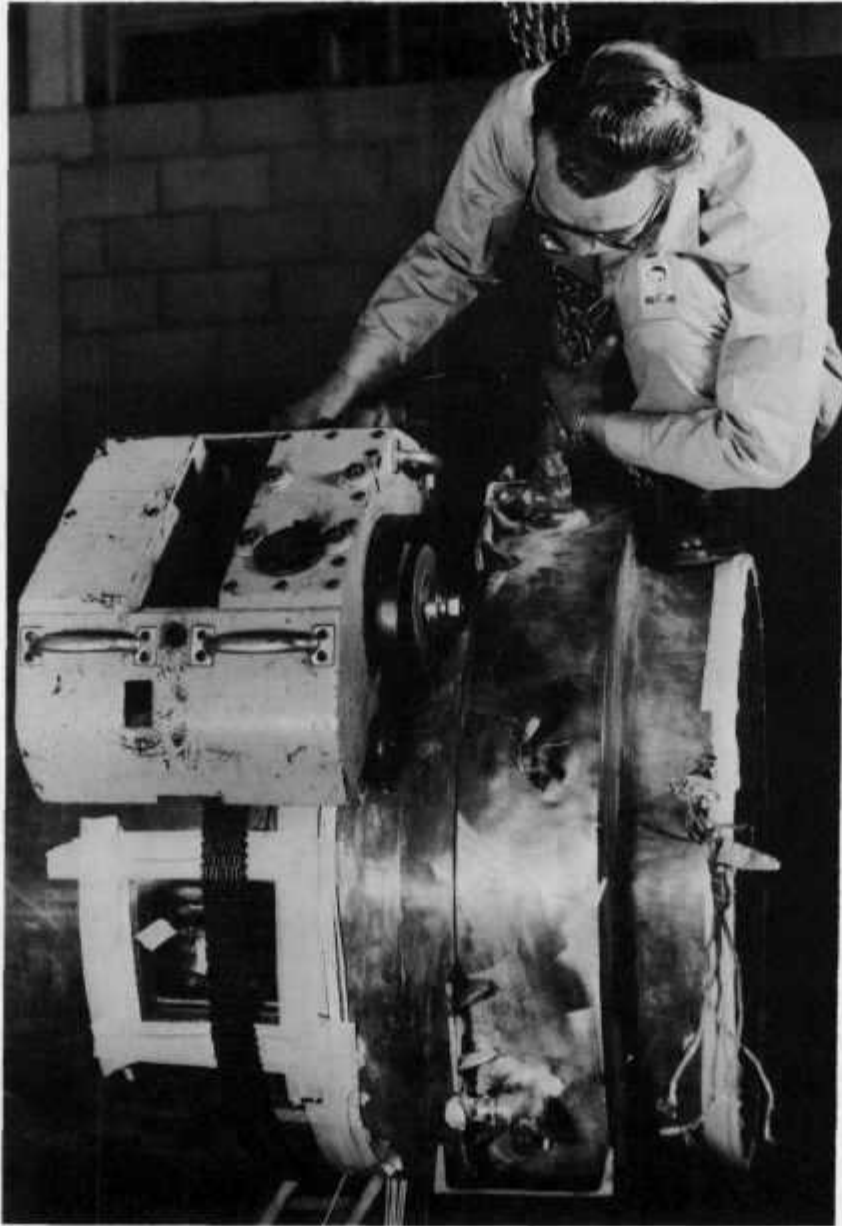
Pneumatically-driven Orbital Saw Used for Cutting Through Steam Generator Shell. The cut is being made to remove the lower tubesheet.
